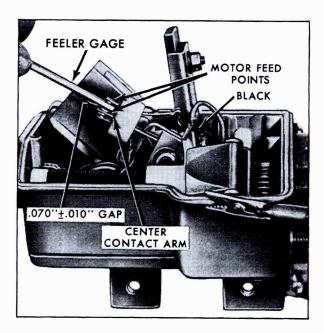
Motor Feed Points Adjustment (Full Gap)
